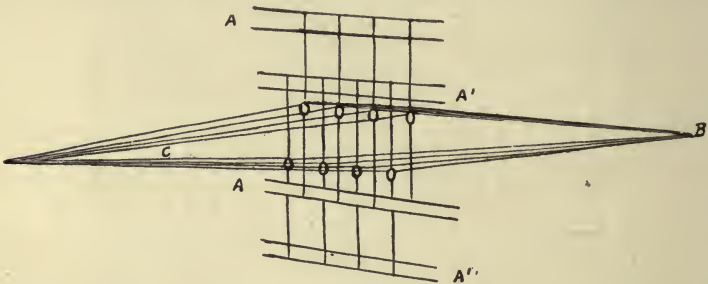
DETAIL OF HARNESS, SHOWING ONE HEALD SHAFT RAISED, THUS FORMING SHED.
